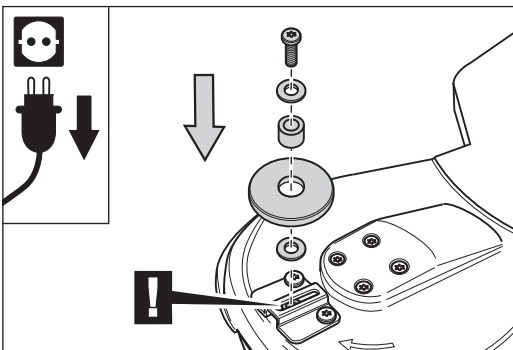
Assembly of the wall-protecting roller. Pay attention to the nut in the holder!
